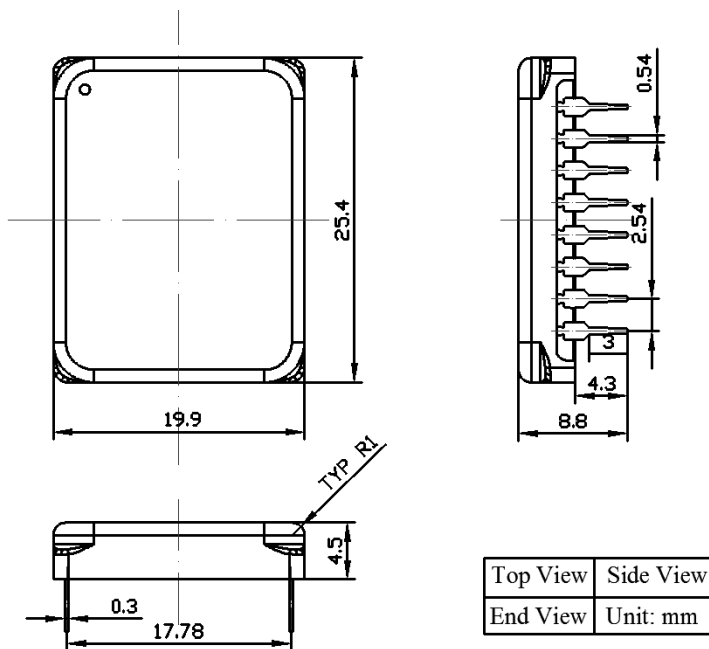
Dimensions of the DIP package controller of TECA1-xV-xV-DAH
